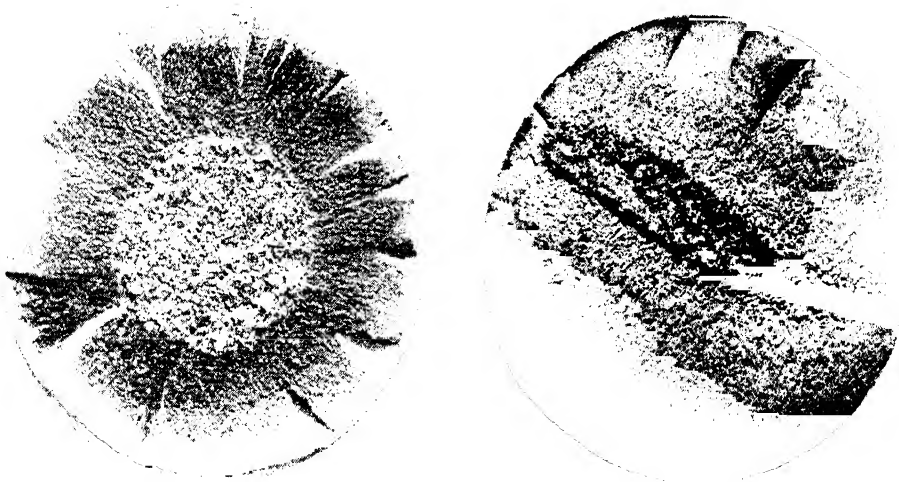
FATIGUE FRACTURES AS FOUND IN AXLES AND SHAFTS
